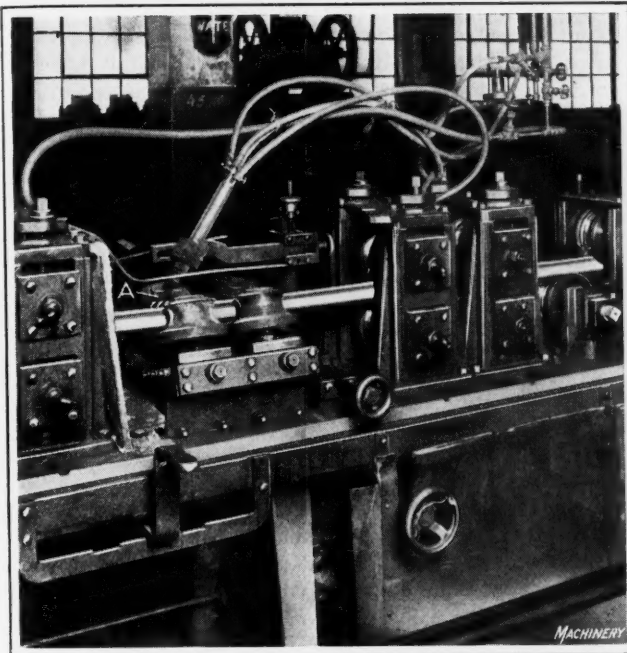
Oxy-acetylene Machine for welding the Tubing
